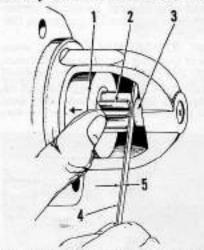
Measure pinion clearance with a feeler gage as shown. Refer to paragraph 209 for specifications.
